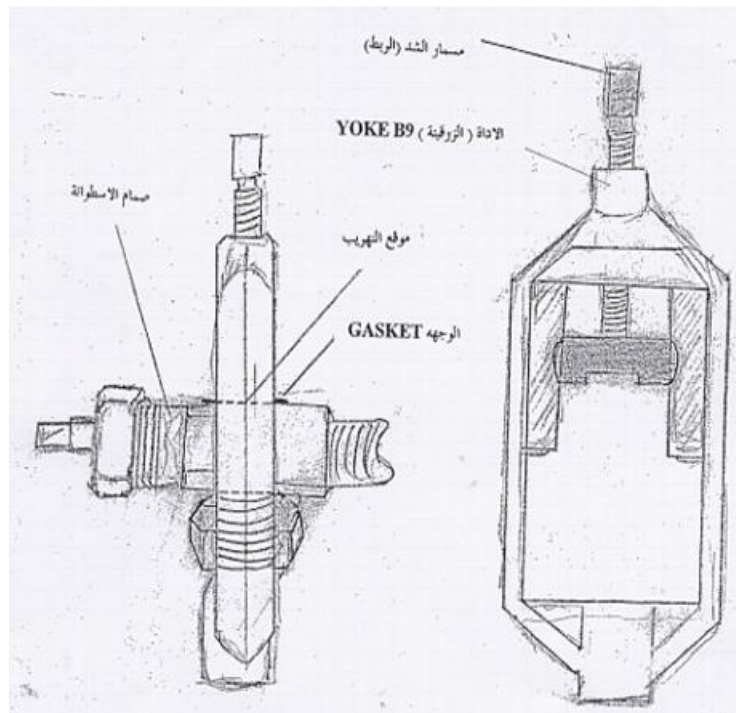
Leakage Stopping Method for the Main Valve of the Container
